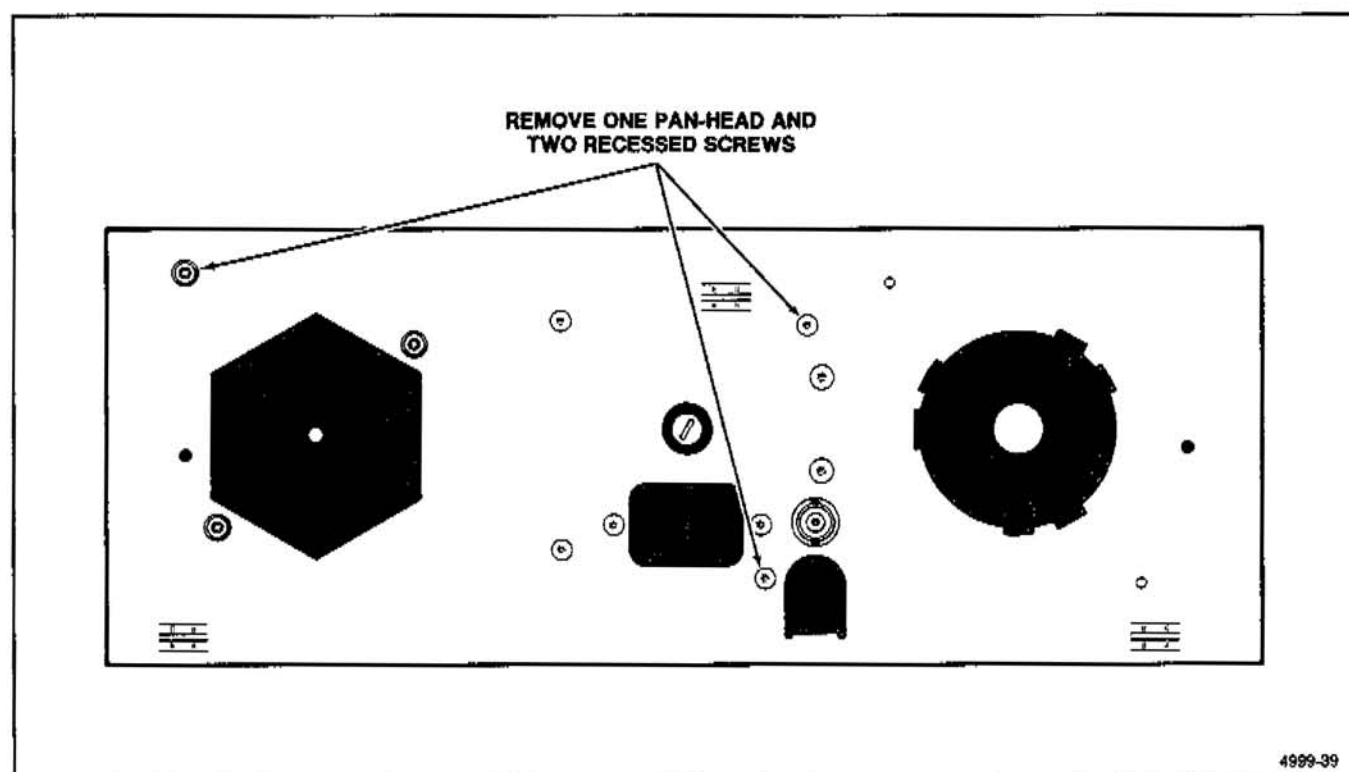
Location of screws securing Power Supply shield and the support bracket to the rear chassis frame.
